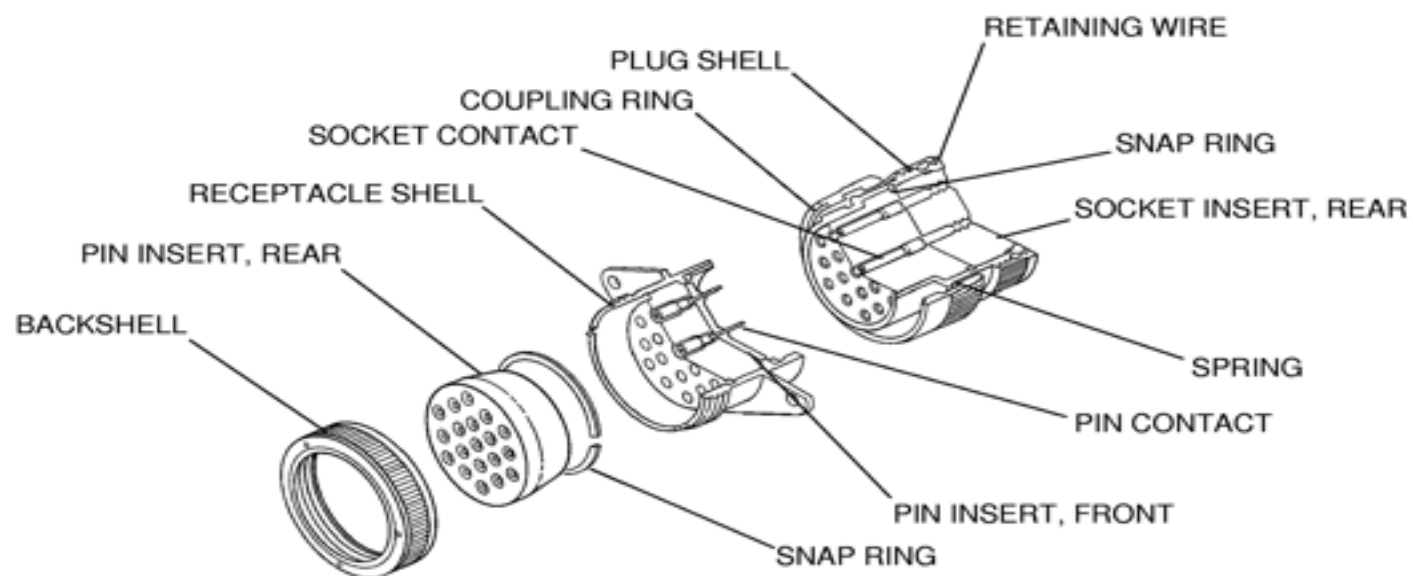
Sheet 1 : Crimp-Type Connector Assembly
